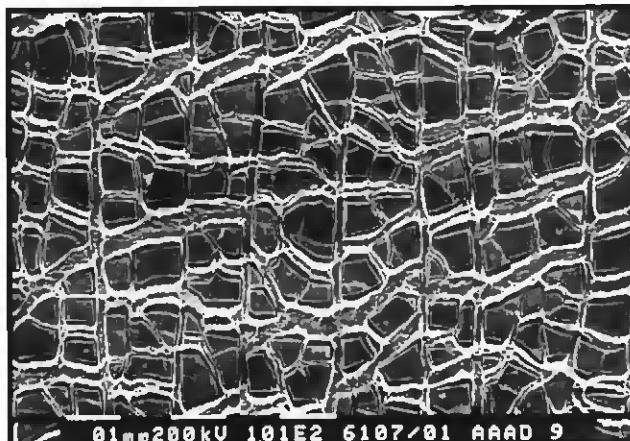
Weld interface surface after fracture, cold roll welding Al-Al with one-sided anodizing (AAAD),  $Y = 0.602$ .
